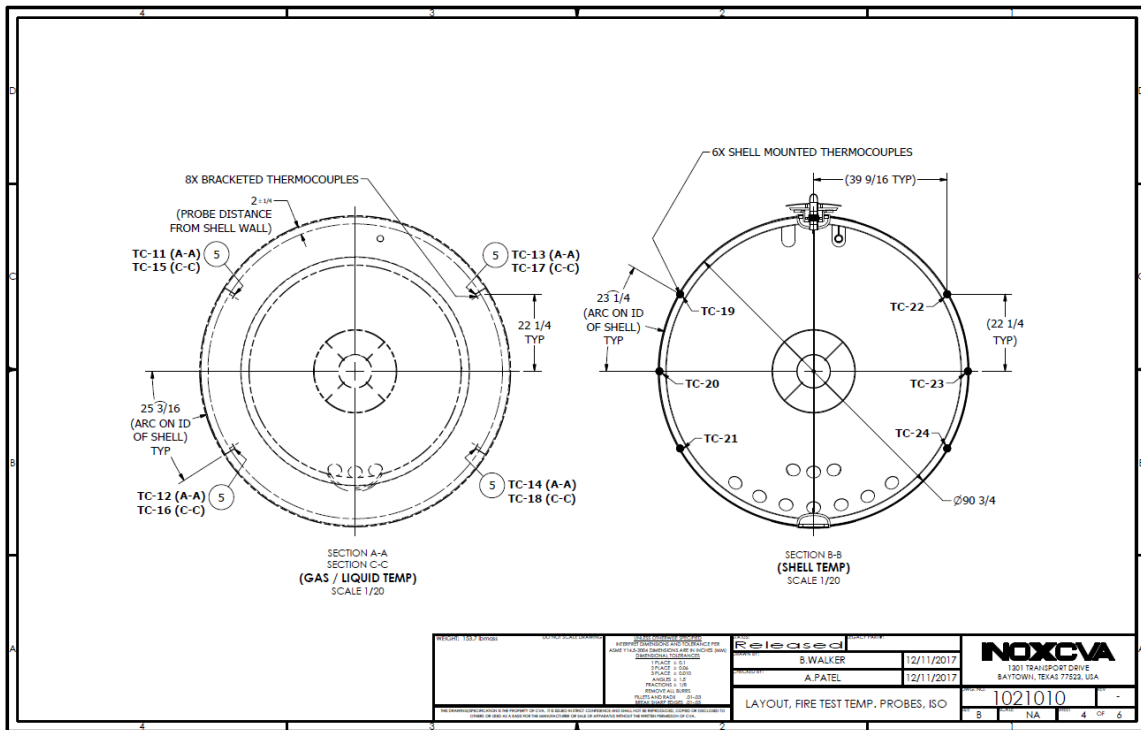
ISO Tank Showing Additional Details for Thermocouples Installed on Shell of Inner Tank (provided by CVA)
